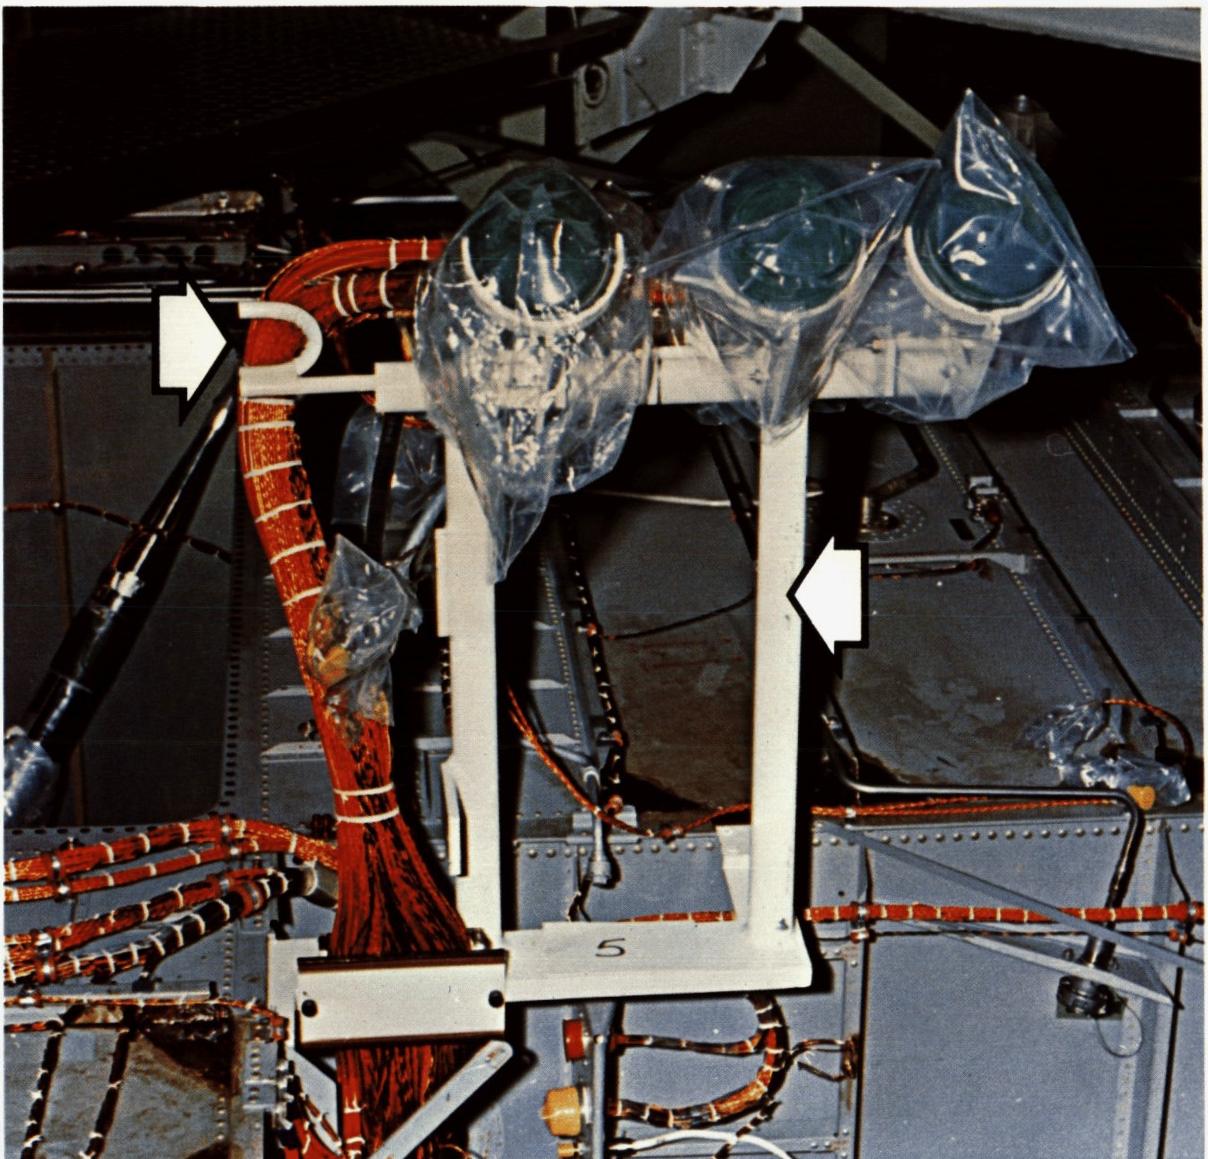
An auxiliary support device is provided to support the wire cables and harnesses during repair or partial installation. Note the arm at upper left of fixture to prevent flexing of the harness.
